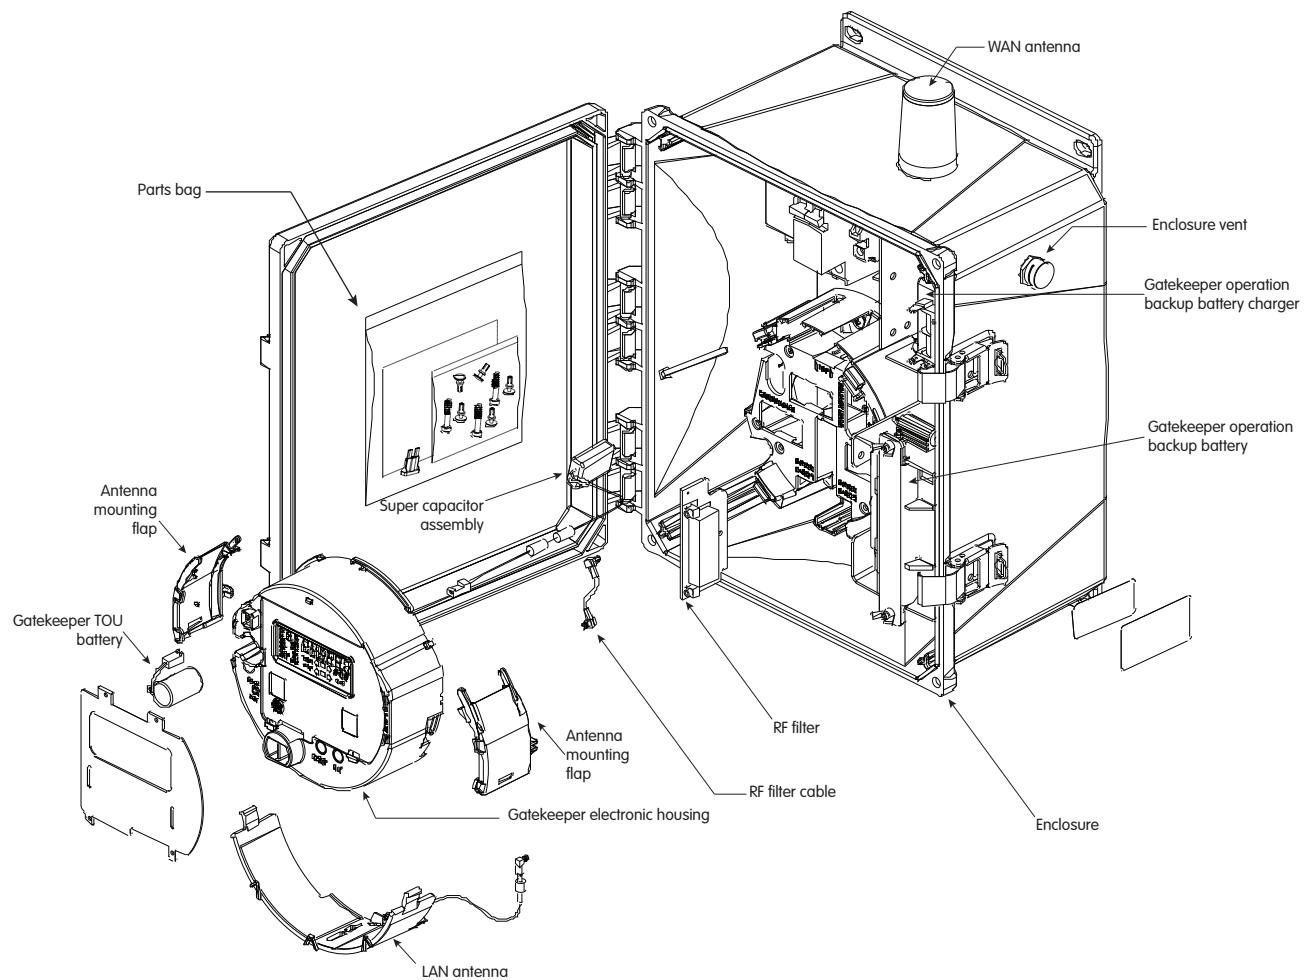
Exploded view of the EA_Gatekeeper model 2110 (model 2111 similar)
